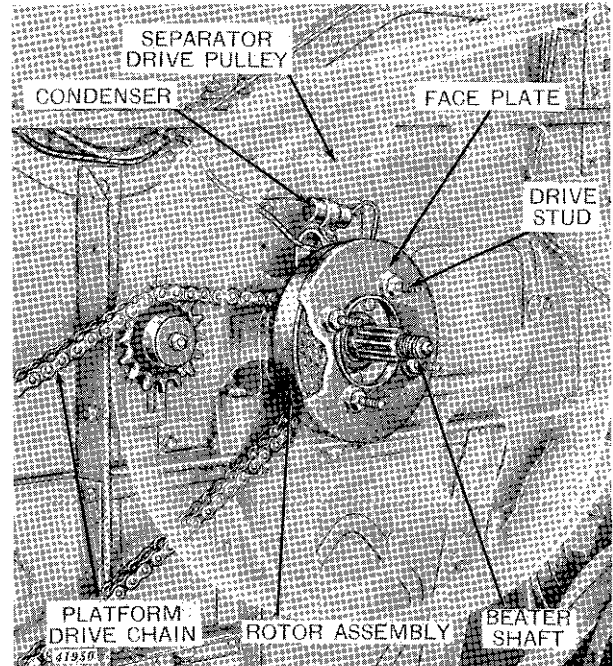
Electro-Magnetic Platform Throw-Out Clutch
